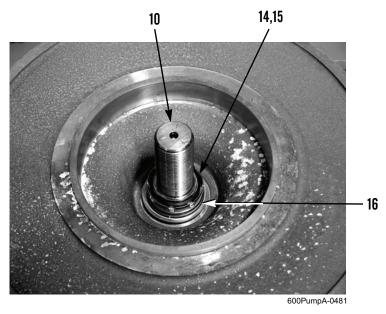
Shim(s), Seal Washer, and Rotating Portion of Seal.
